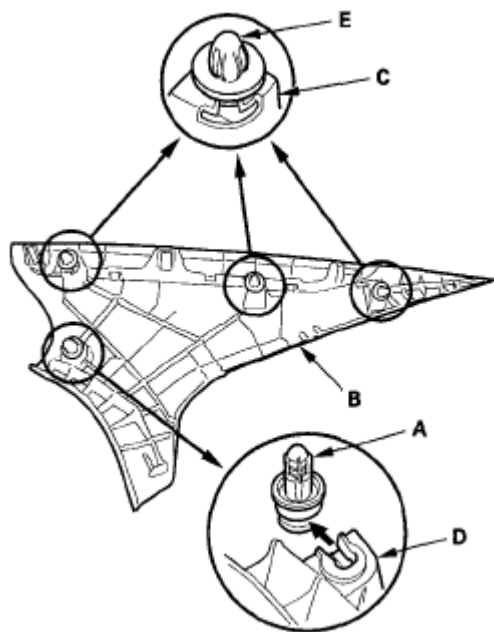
Removing Front Clip From Removed C-Pillar Trim
